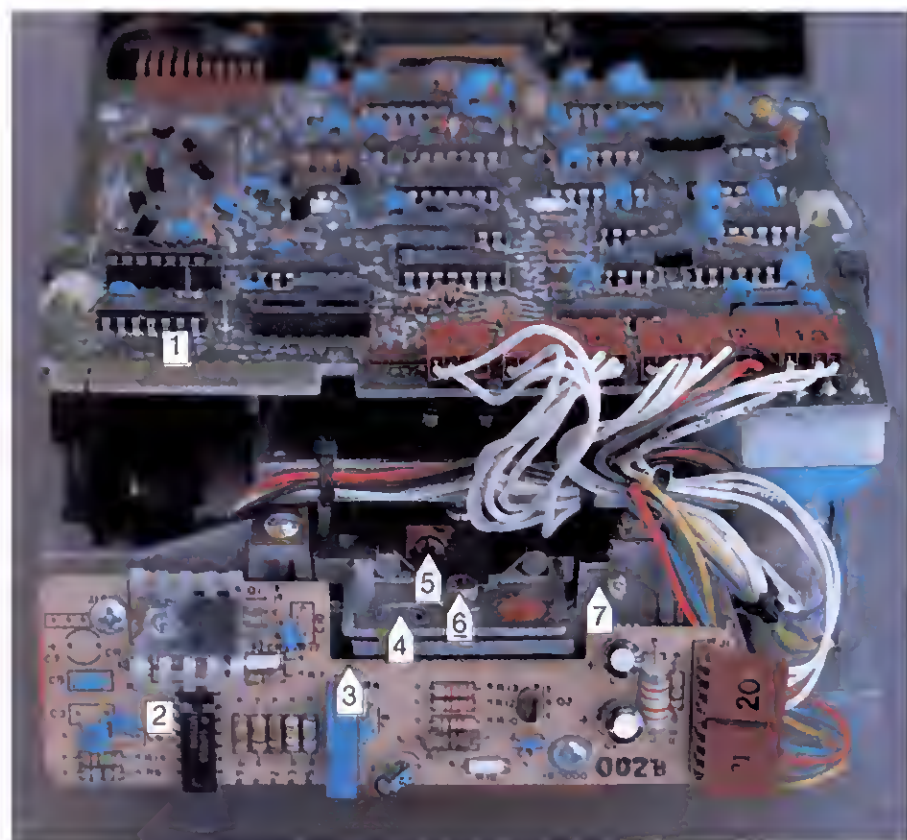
Rear view of a Tandon drive. (1) Main logic PC board. (2) Motor speed control PC board. (3) Motor speed adjustment. (4) Head alignment adjustment cam screw. (5) Track zero stop screw. (6) Head alignment screw. (7) Track zero switch adjustment screw.
